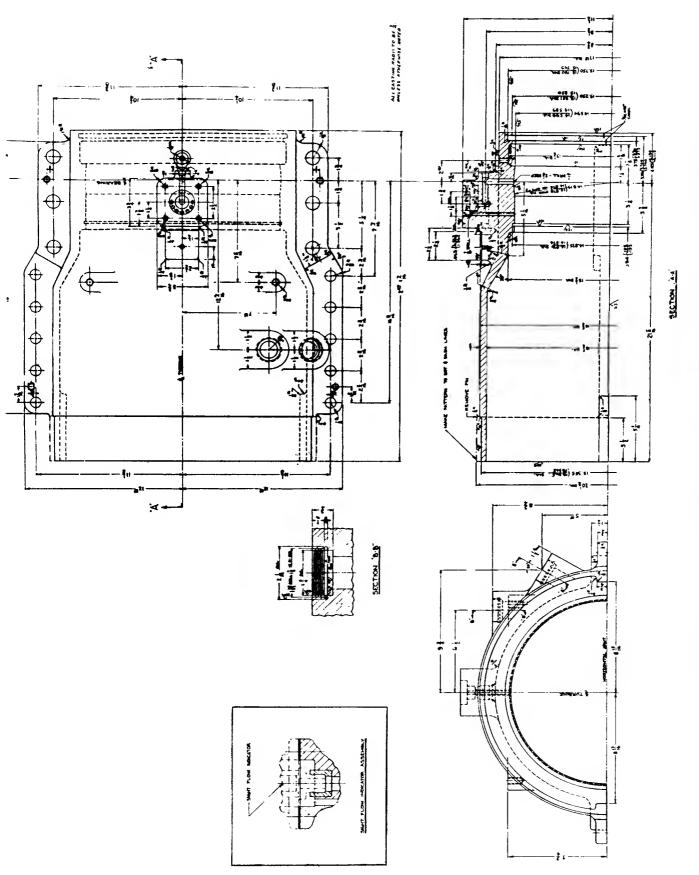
LP Turbine Thrust End Bearing Cover -- Original Design.
